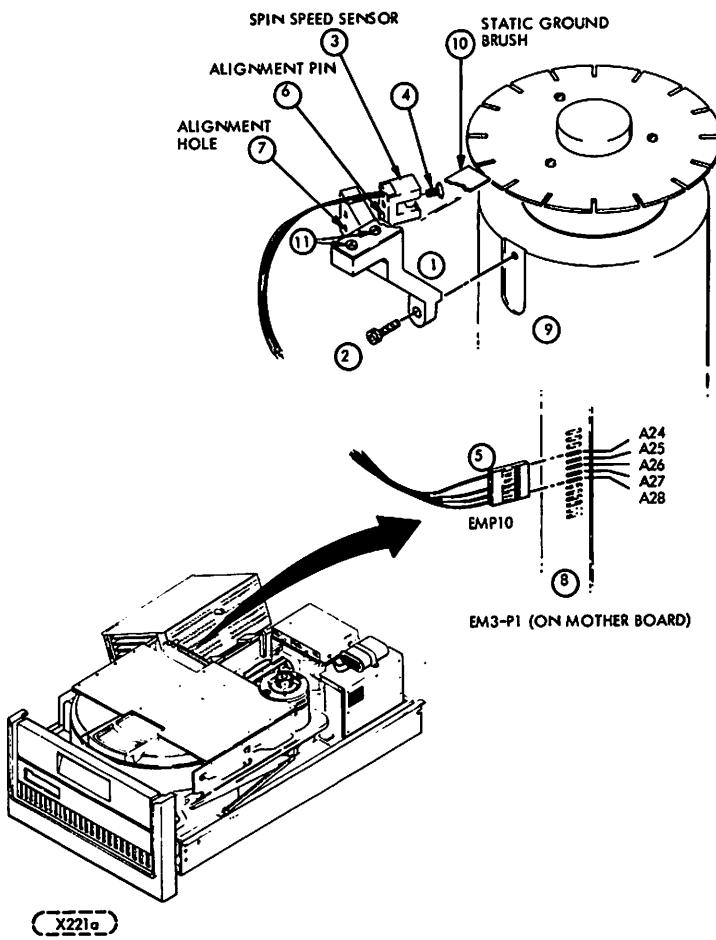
REMOVAL AND REPLACEMENT OF SPIN SPEED SENSOR ASSEMBLY
